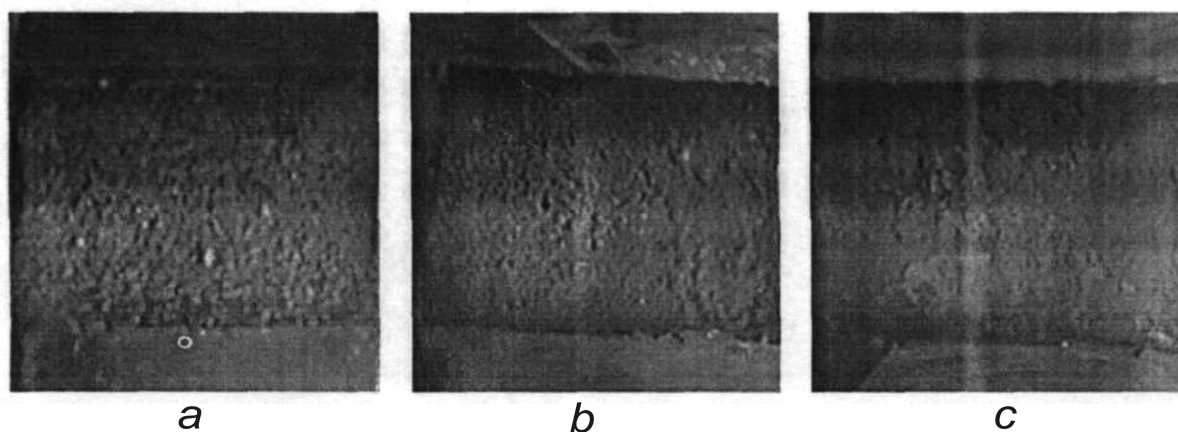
Cuts castings with the addition of technological samples: a - casting obtained from the original mixture; b - casting, obtained from the mixture with the additive OS; c - molding obtained from a mixture ORRN
